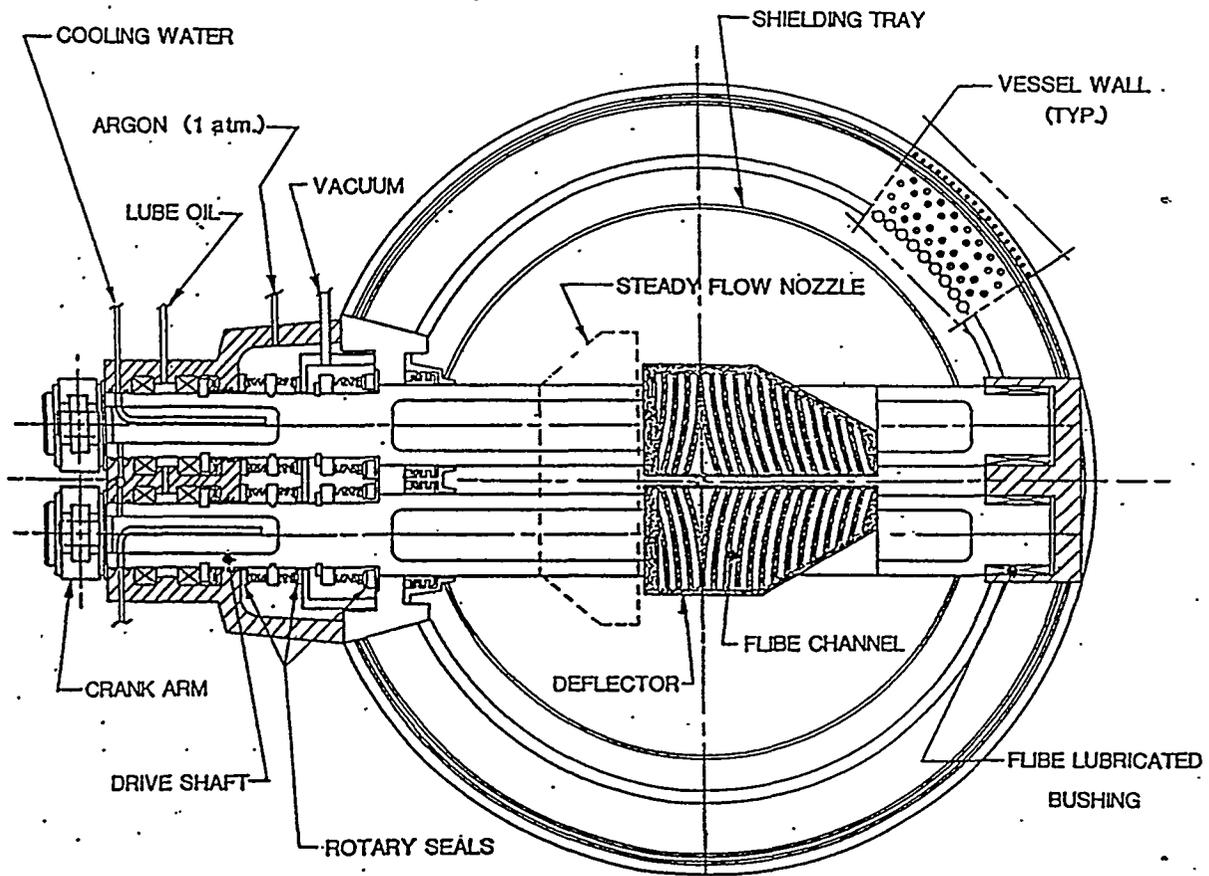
FLIBE DEFLECTOR DRIVE SHAFTS
